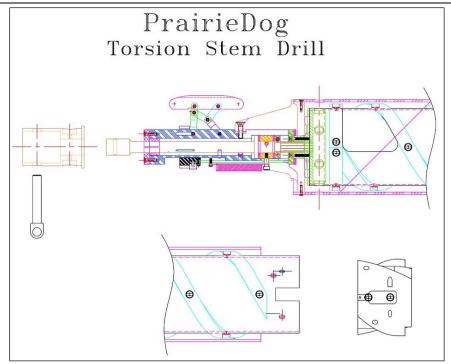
This sectional view shows the torsion stem adapter removed from the sliding power shaft. The pin shown is the rope attachment pin necessary to use the SideWinder for power lifting. Only one of the three anti-torque blades is shown for clarity. The outer barrel is seven feet (2.1m) in length. The total length of the Prairie Dog is approximately eight feet (2.4m).
